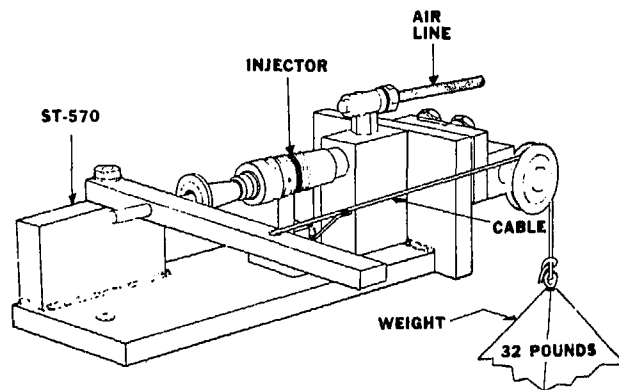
Testing injector plunger-to-cup seating — ST-570
